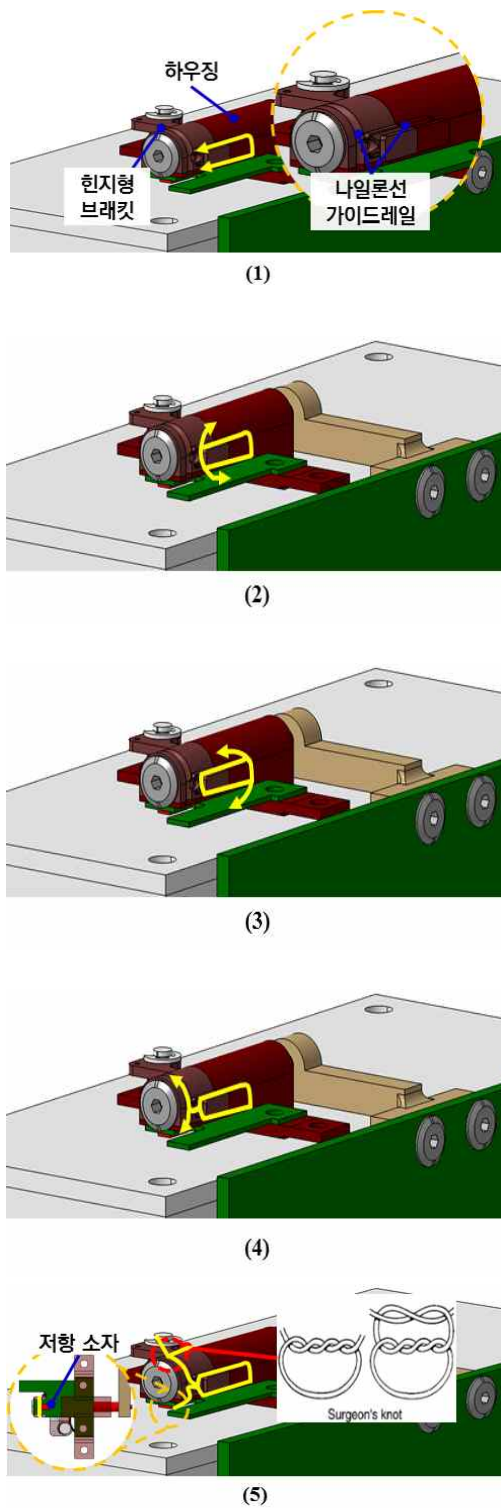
Nylon Wire Tightening Process on the Pin-puller Mechanism
